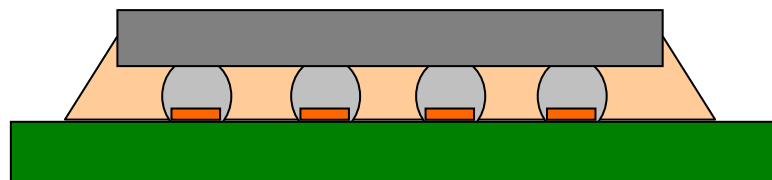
Structure of Solder Based Flip Chip Assembly
